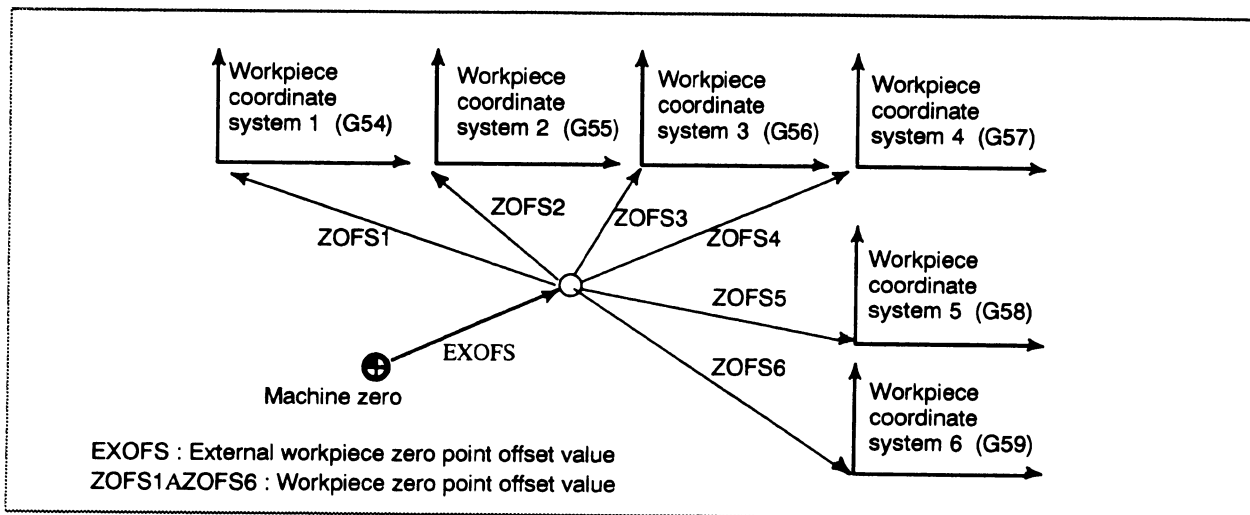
(a) Changing an external workpiece zero point offset value or workpiece zero point offset value
